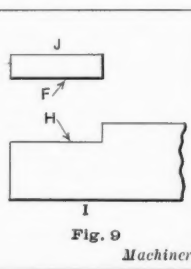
Surfaces to be welded that must be freed of Rust, Scale and Oil
